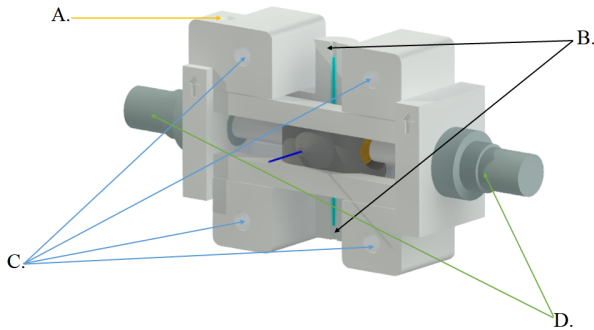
Holder for electrode housing unit in greater detail. A: Attachment point for optomech post. B: Supports for quartz capillary. C: Holes for screws, together with bolts allowing the holder to be tightly secured. D: SHV-connectors, connecting the device to the voltage source.
